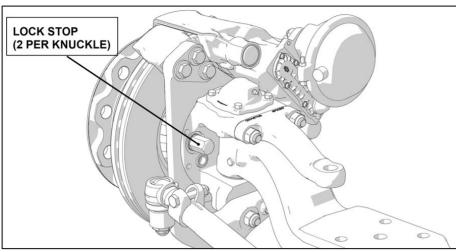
FRONT AXLE STEERING KNUCKLE
